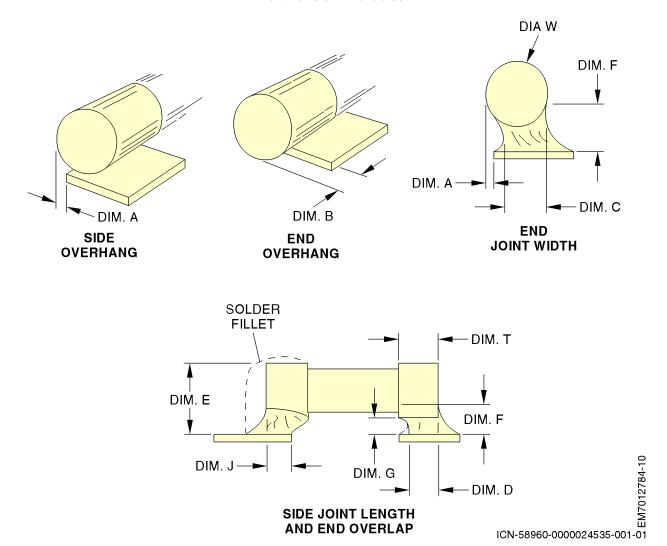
SMT Cylindrical End Cap Termination Alignment
